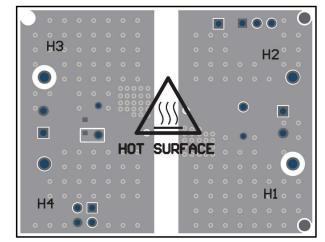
PCB Bottom Layer, Assembly (mirrored view)
